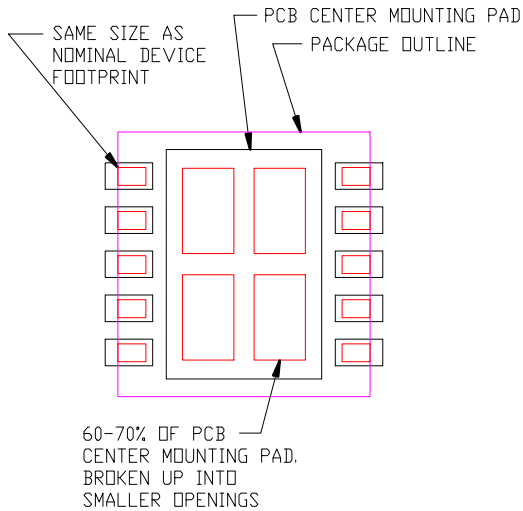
Typical Less than 0.5 mm Pitch DFN/QFN Package with Stencil Openings Shown Over PCB Mounting Pads
